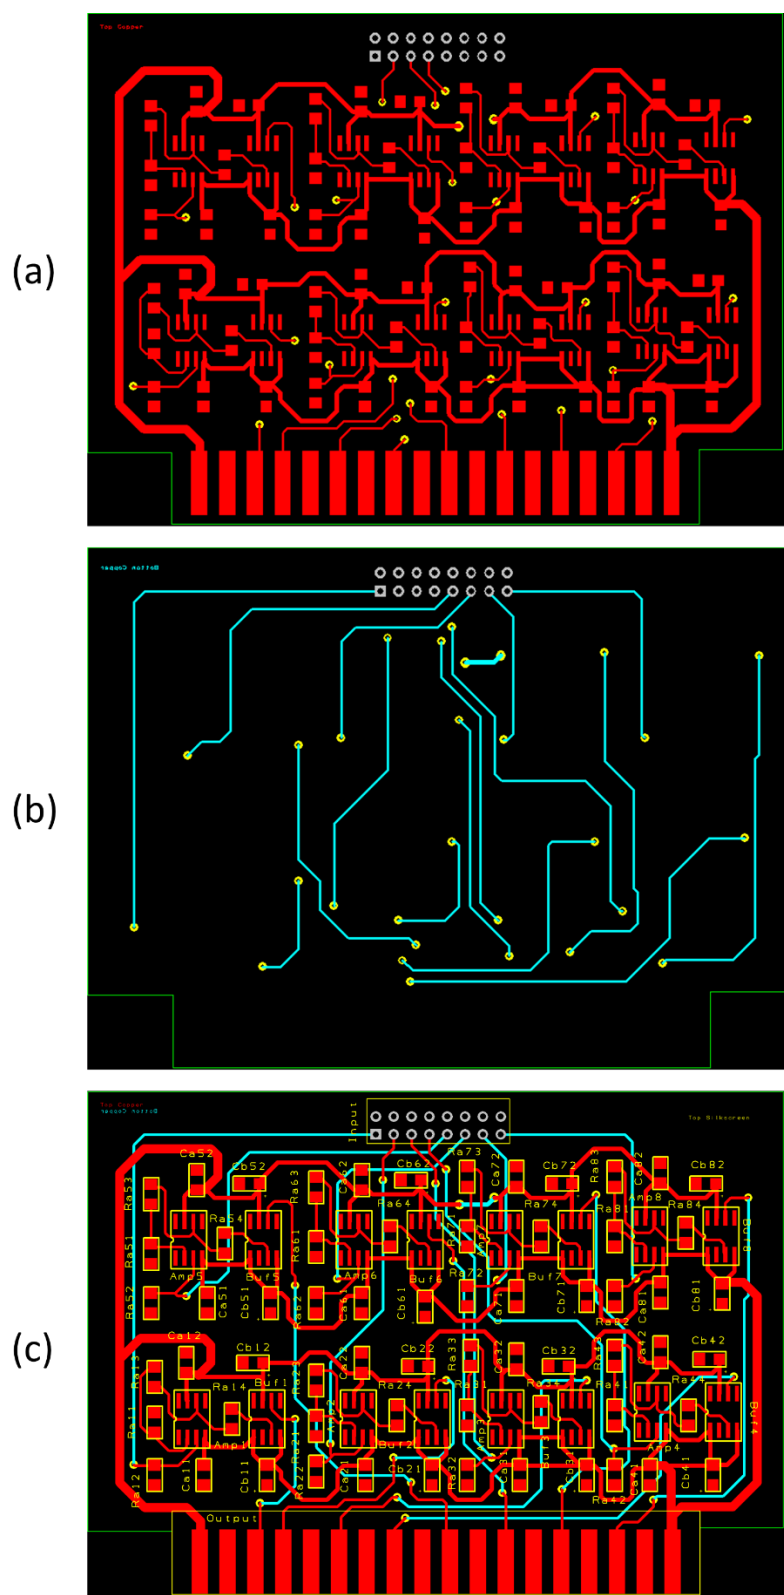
2-layer PCB layouts of an 8-channel power amplifier array. (a) Top layer. (b) Bottom layer. (c) Stack-up layout.
